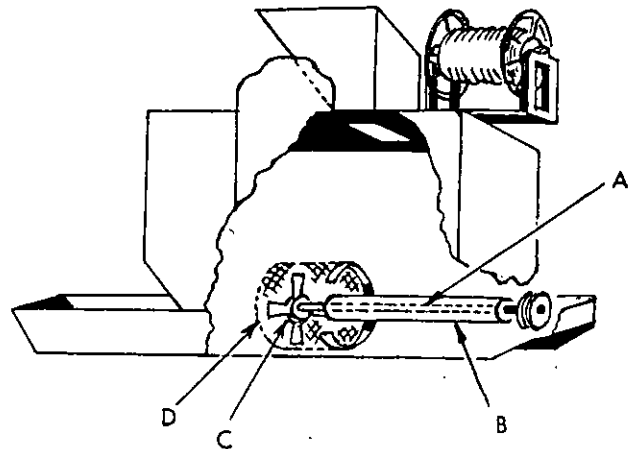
Cutaway view of impeller assembly (A, 1 3/16-inch metal shaft; B, 3-inch galvanized pipe; C, impeller blade; D, metal shroud).
